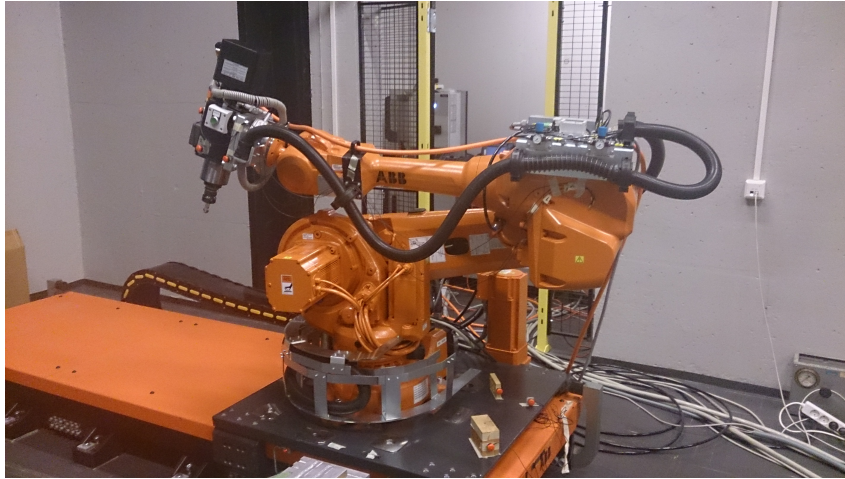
An IRB 4600 manipulator with tool on conveyor belt
